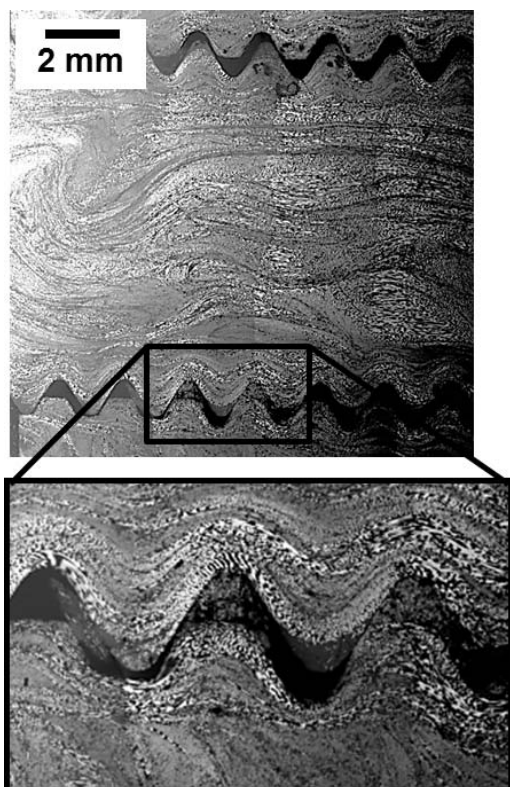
Optical microscopy cut view of the thread from a CFRP-bolt for the first investigated AE-event
